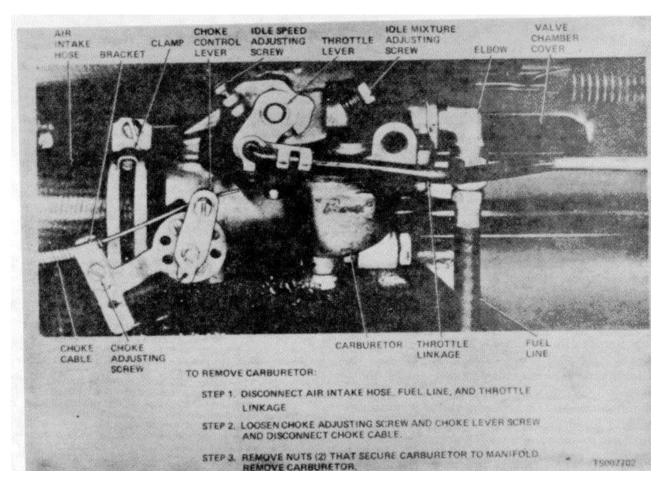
Carburetor, Adjustment Points, Removal and Installation
